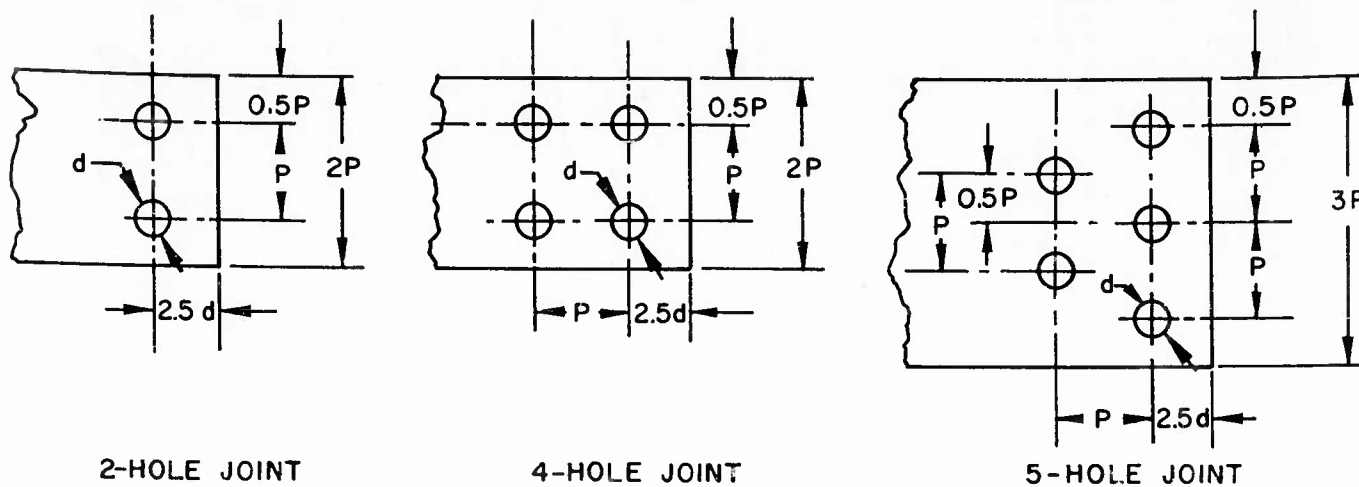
Geometry for 2, 4, and 5 Fastener Joints
